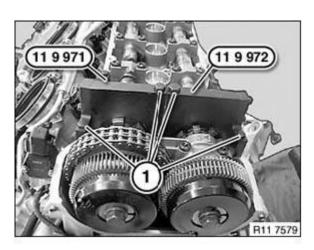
Identifying Special Tools (11 9 971) And (11 9 972) Courtesy of BMW OF NORTH AMERICA, INC.
